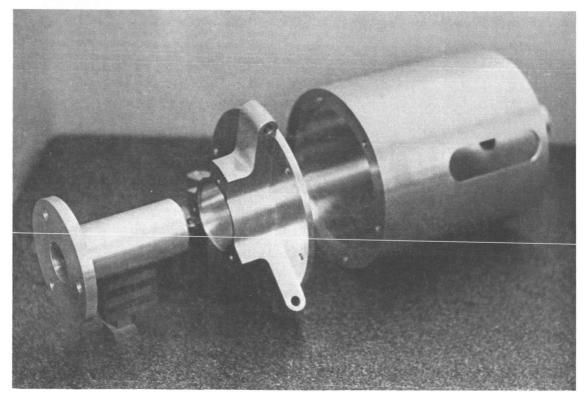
Exploded view of hyperbolic reflector mount, l. to r.: sleeve for main shaft, tripod head main housing
